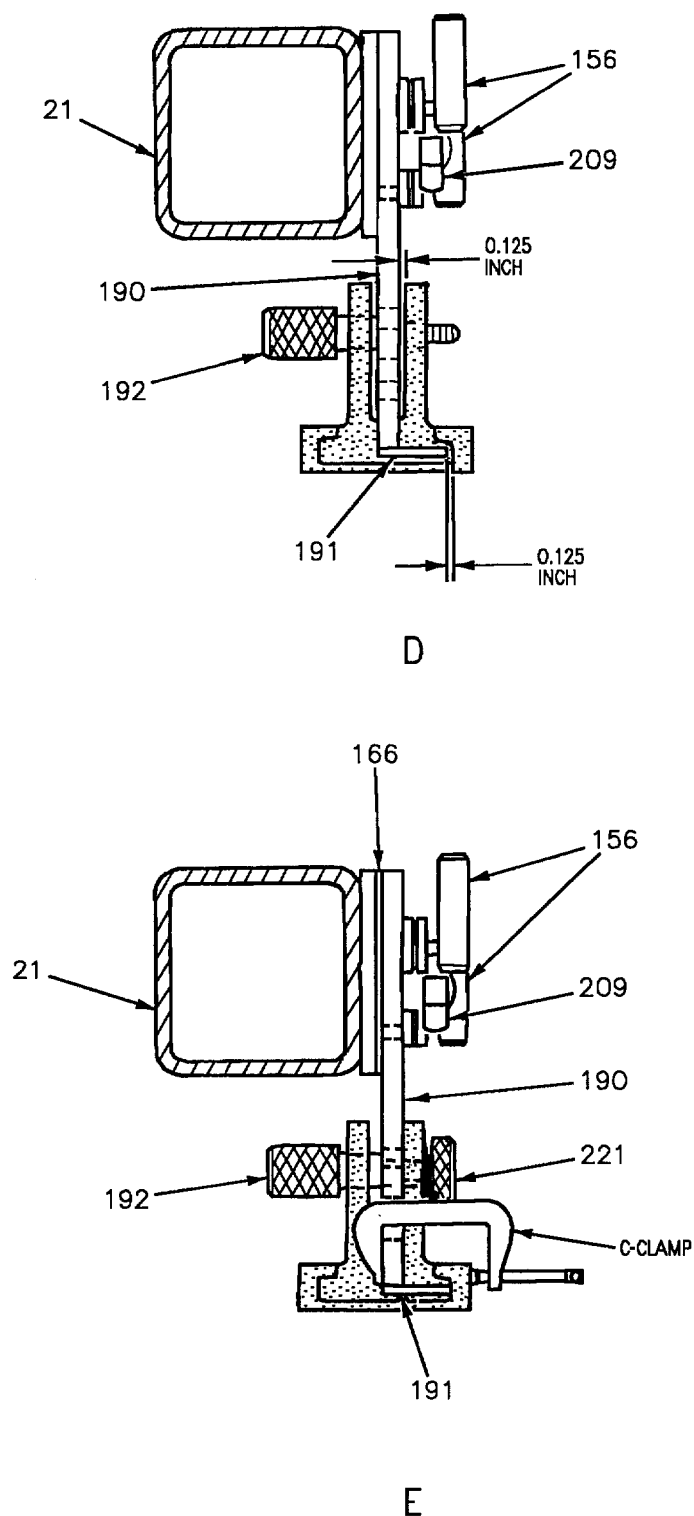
Inspection or Replacement - Thruster Support (Sheet 3)
